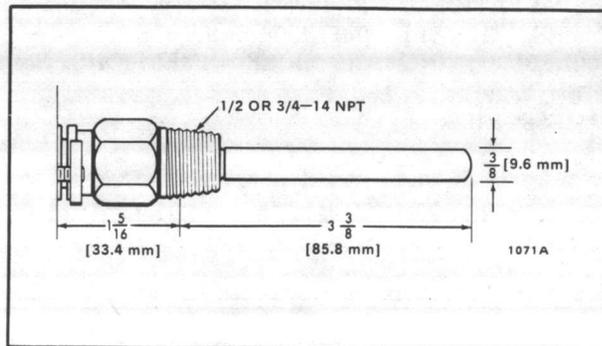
BOILER FITTING AND BULB DIMENSIONS FOR L4006C, L4007D, AND L6006B.
